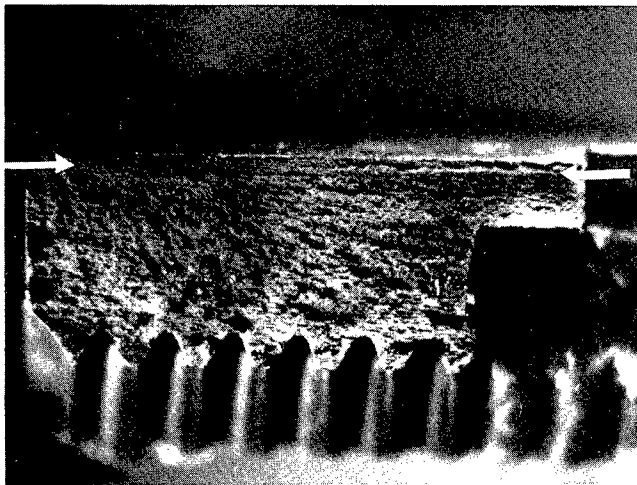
Micrograph of fracture half "B" showing corrosion. Mag. 10x
